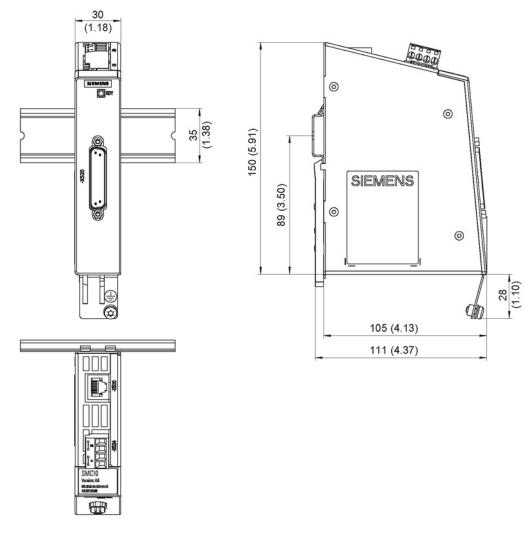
Dimension drawing of the Sensor Module Cabinet SMC10, all dimensions in mm and (inches)
